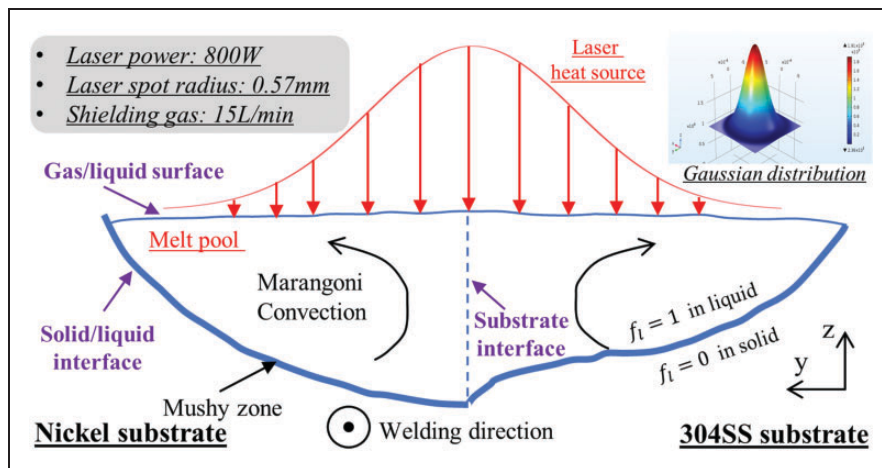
The schematic diagram of melt pool and interface conditions in dissimilar laser welding.
